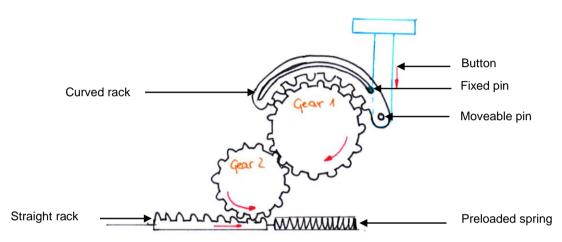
Schematic drawing of the first mechanism.
